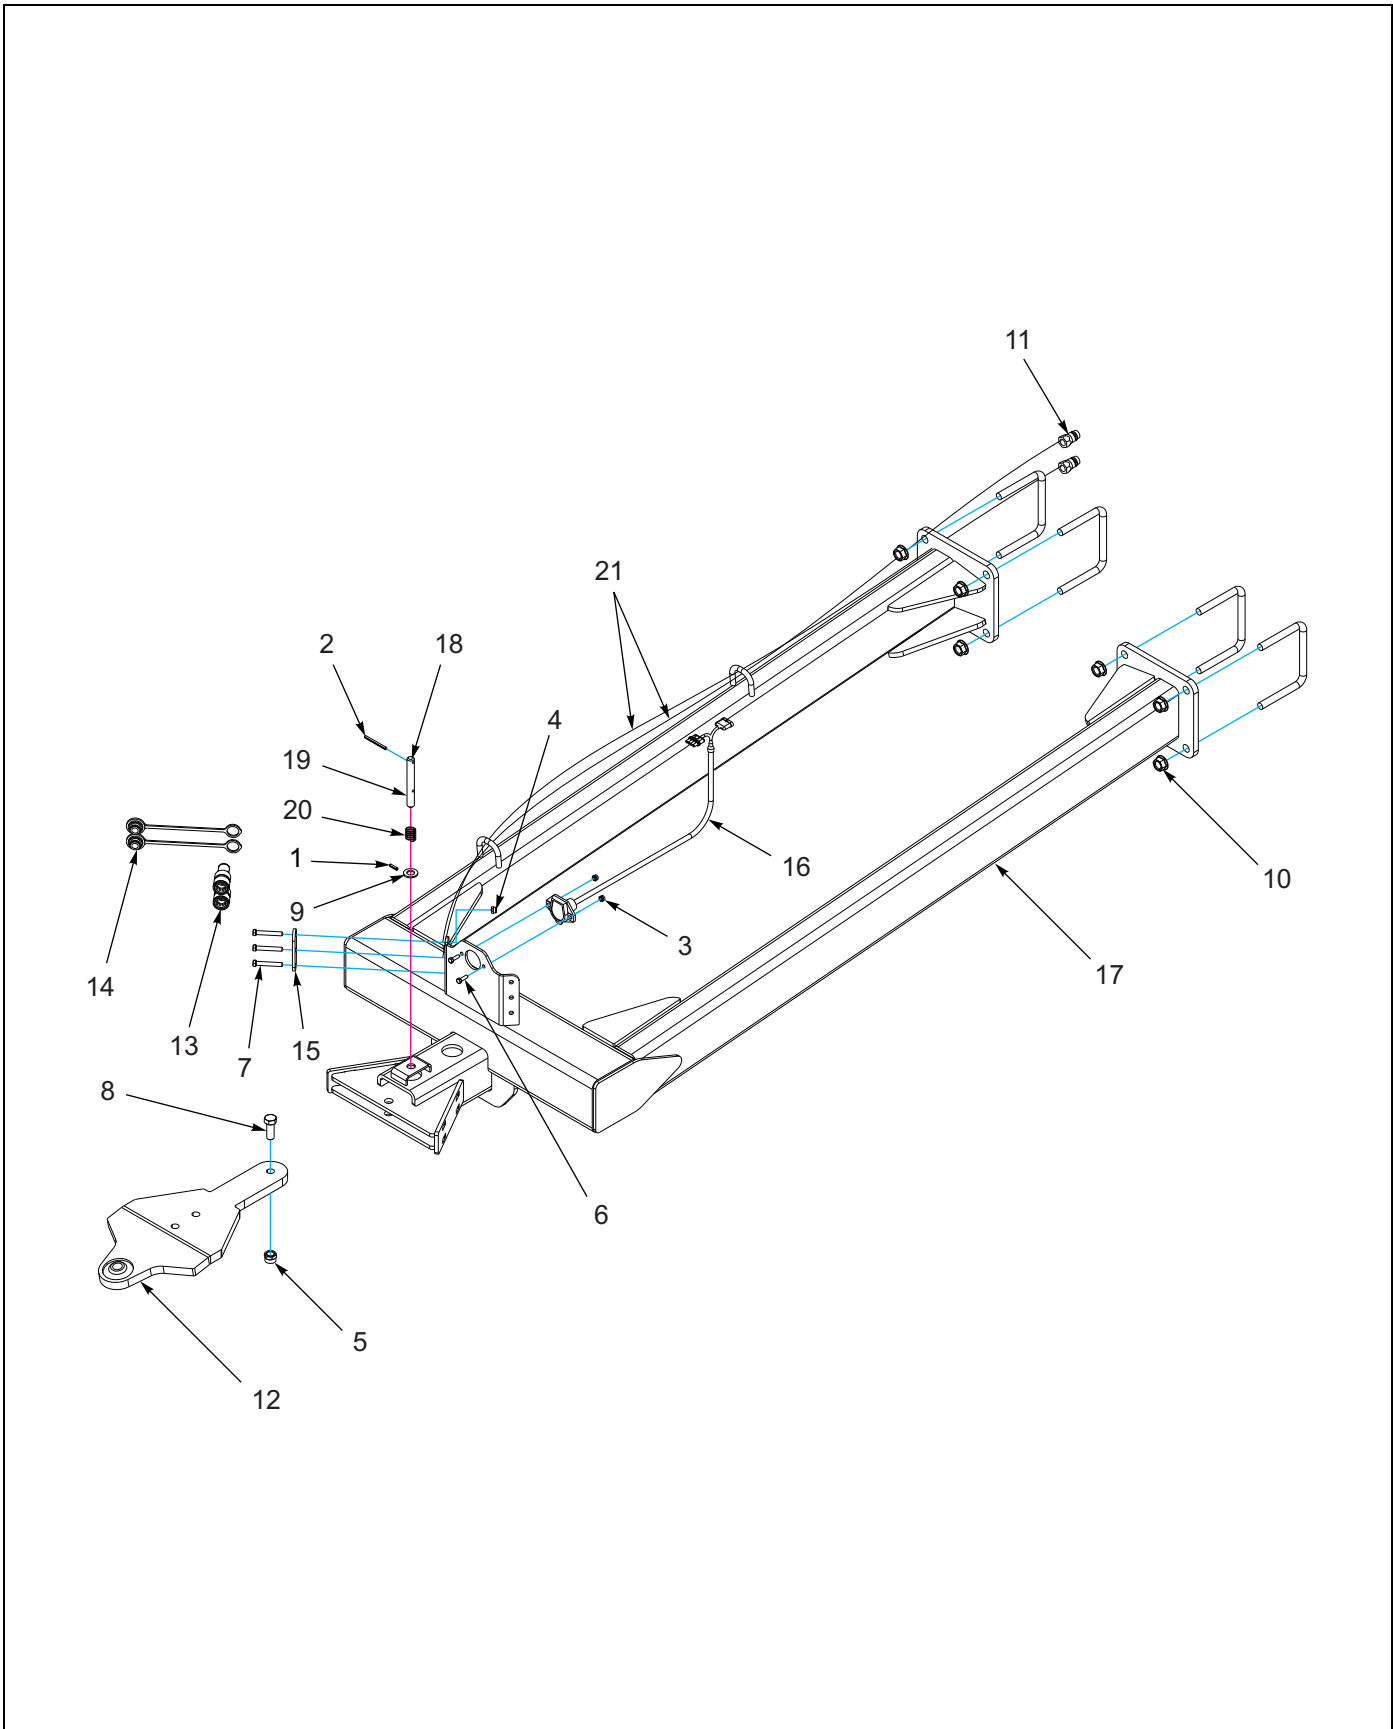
Rear Hitch Assembly - Folding 7 & 9 Shank
